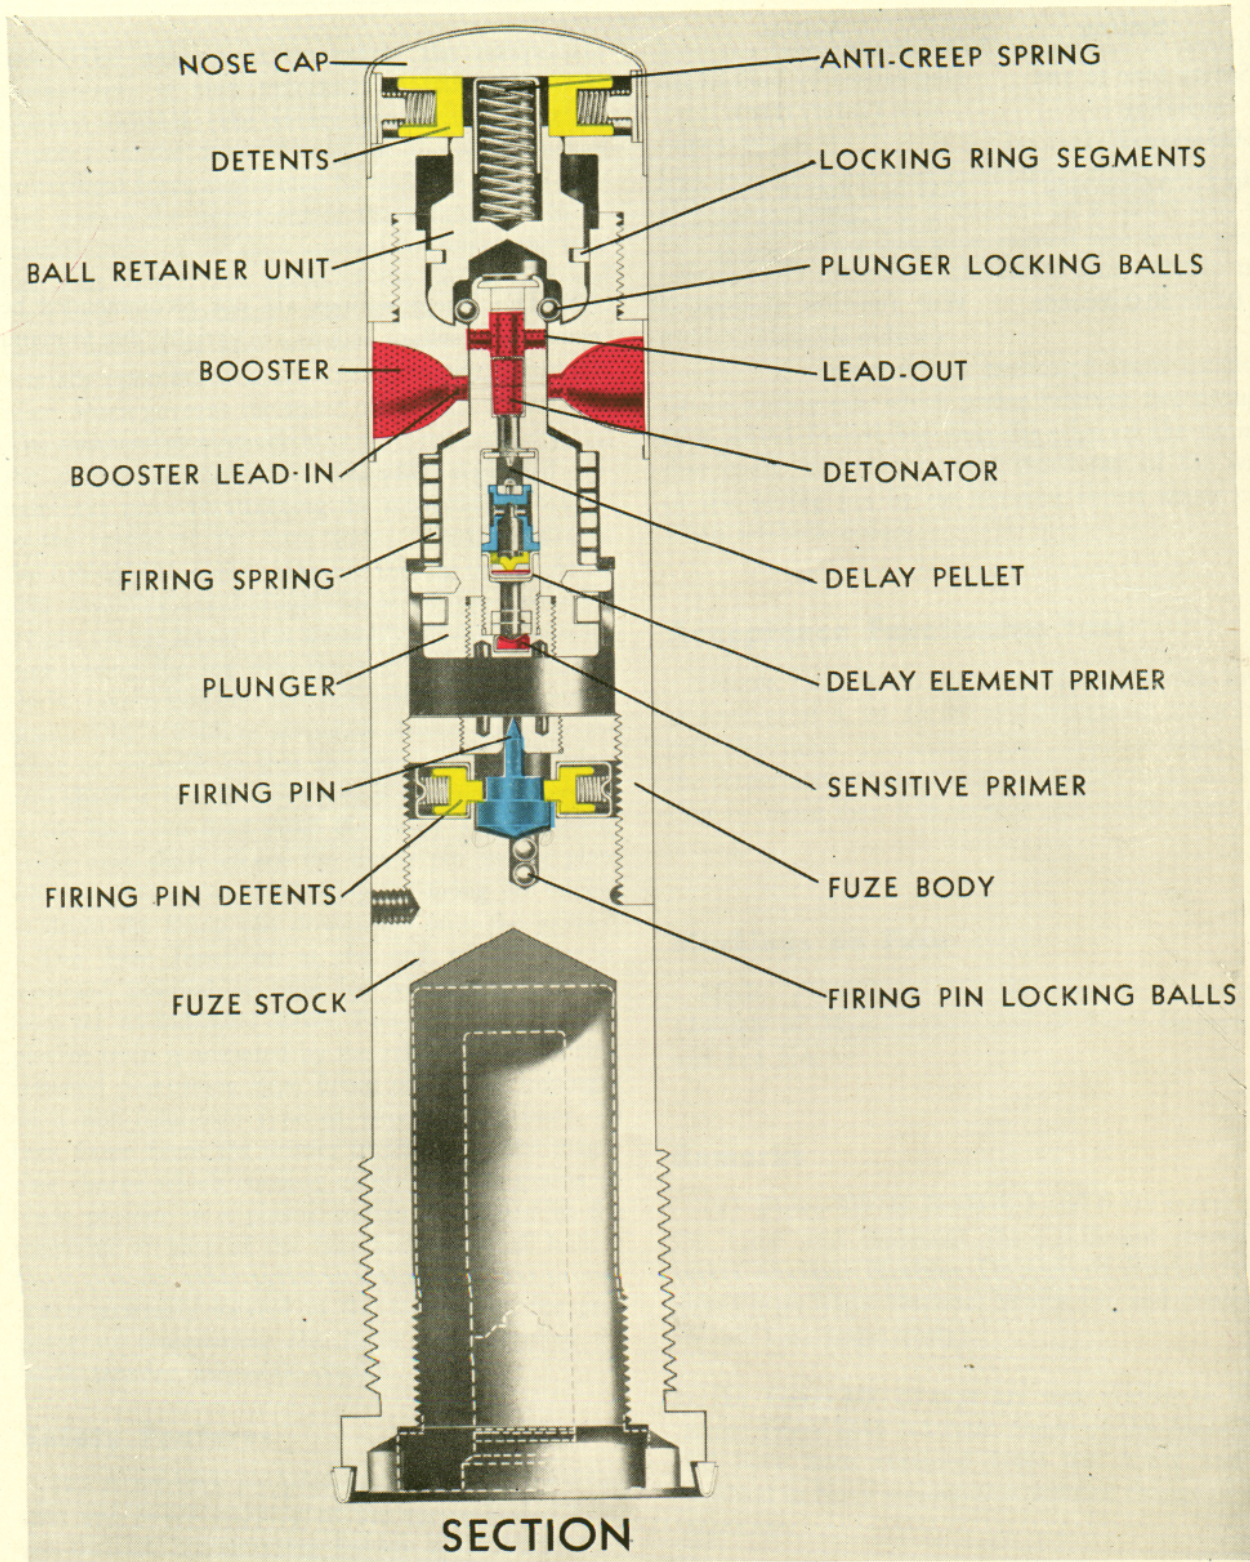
Base Detonating Fuze Mk 23—Sectional View
